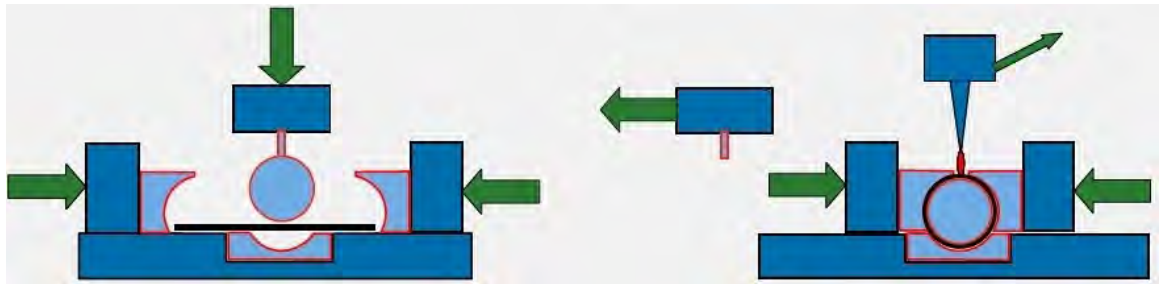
Forming process to produce tubular component using a mandrel and lateral dies
